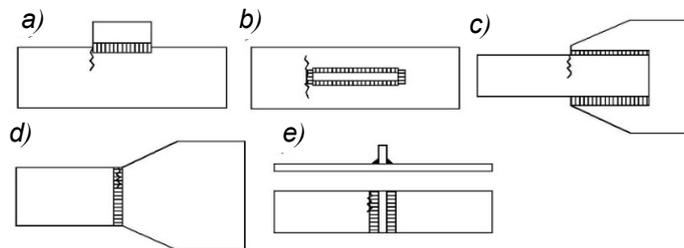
Examples of joints with cracks propagating through parent metal (a - c) and along welded joint (d, e)
